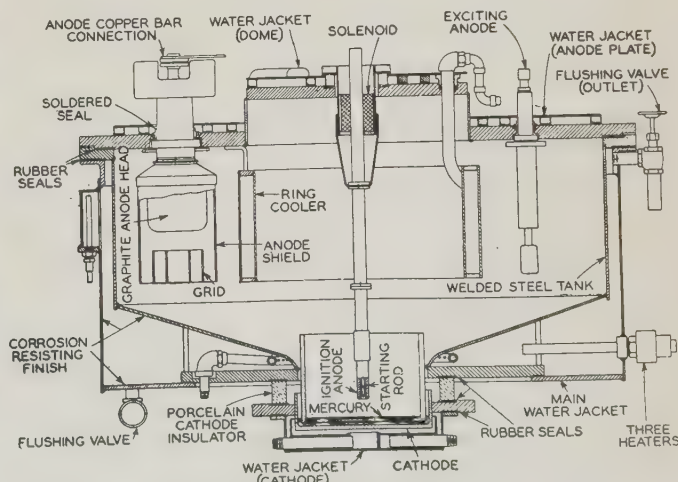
Cross sectional view of the 1,250-amp rectifier section shown in Fig. 2
